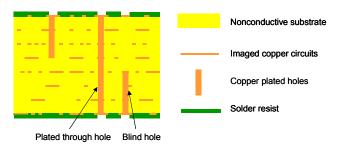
Cross Section of a Printed Wiring Board with PTH Holes and Blind Holes
